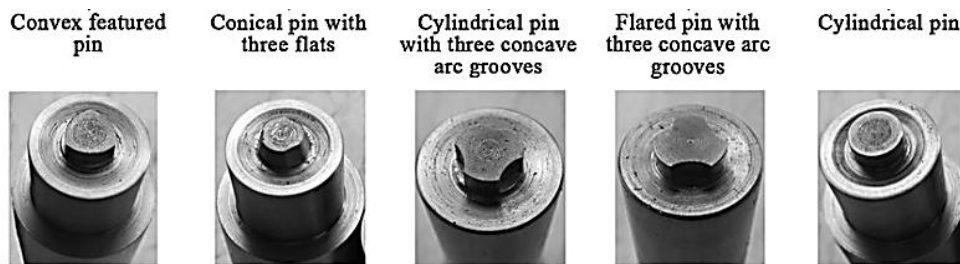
Friction stir welding tools with different pin profiles [36]
